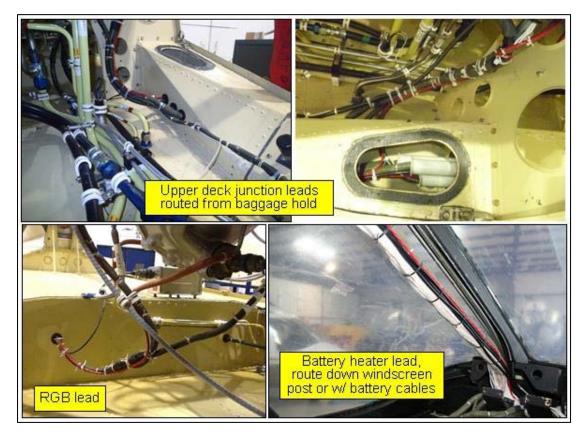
Examples of cable routing, due to variations in equipment and aircraft configuration routing to be determined by user, refer to Cable Kit wire diagram drawing: 02861.
